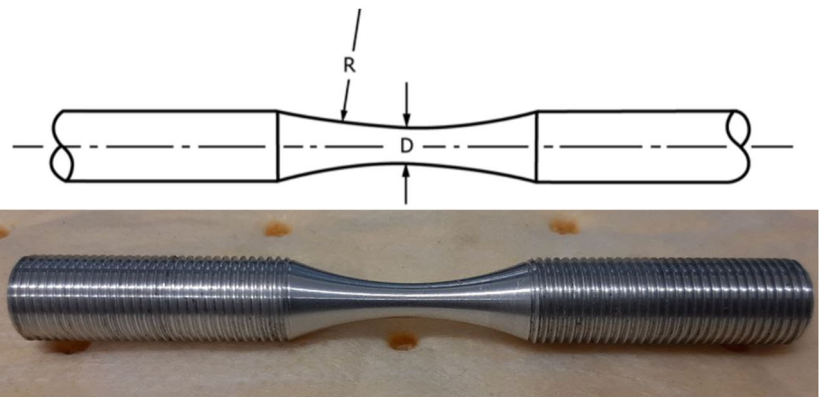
Hourglass specimen geometry for axial fatigue tests according to ASTM E466-21 and real specimen ($D = 4$ mm and $R = 36$ mm)
